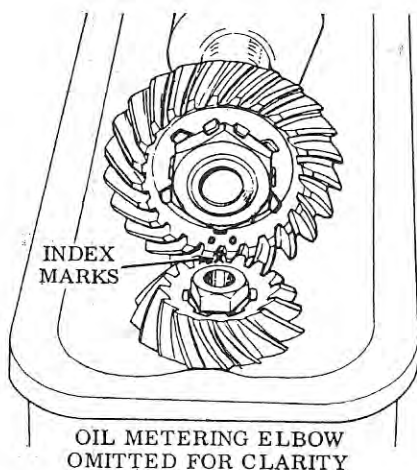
To time the camshaft to the tower shaft, make sure the "X" mark on tower shaft gear is aligned between the two "O" marks on camshaft gear as shown.
